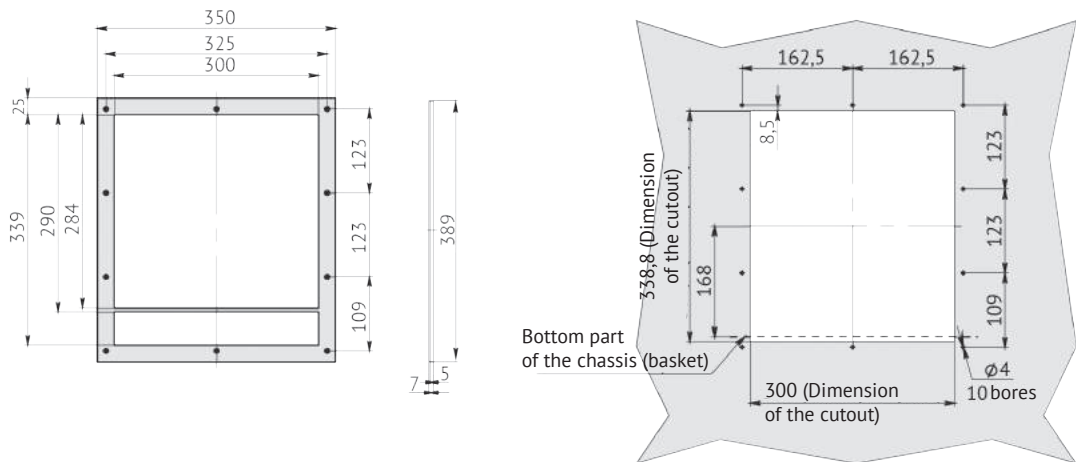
dimension retractable (withdrawable) circuit breakers
